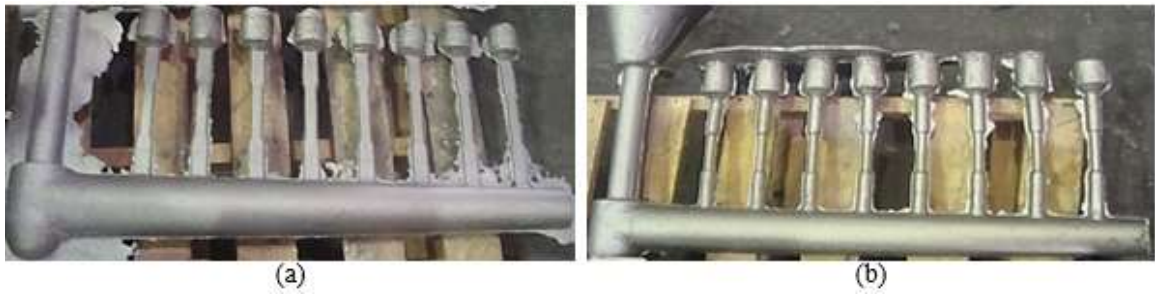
Steel specimens before machining to standard dimensions (a) Tensile and (b) Fatigue
